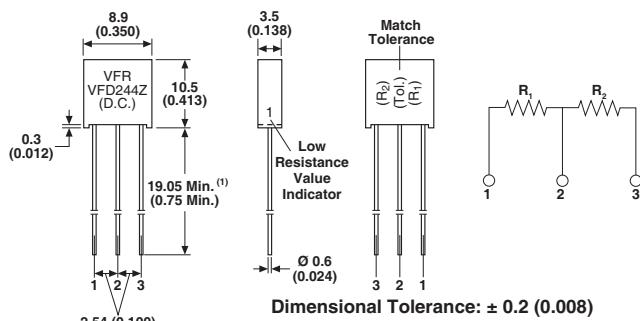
STANDARD PRINTING AND DIMENSIONS in millimeters (inches)
